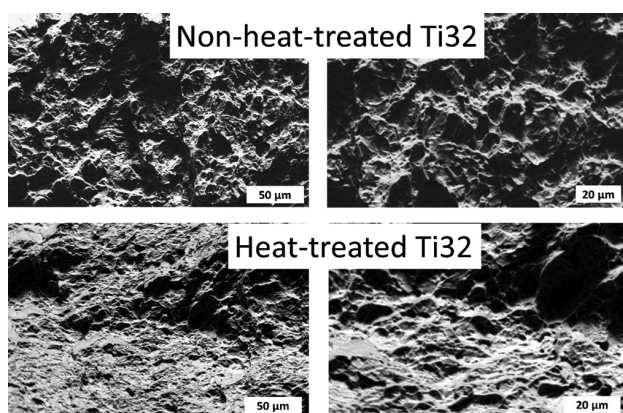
Fracture surfaces of Ti32 tensile test specimens for non-heat-treated and heat-treated conditions.
